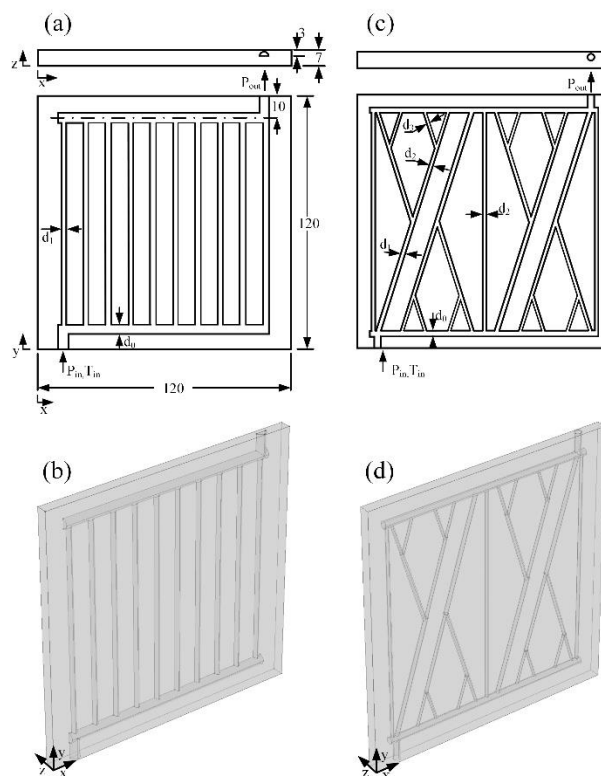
The plate with embedded semi-circular parallel cooling channels; (a) two-dimensional sketch with dimensions and (b) three-dimensional sketch, hybrid cooling channel configuration; (c) two-dimensional sketch with dimensions and (d) three-dimensional sketch [15]
